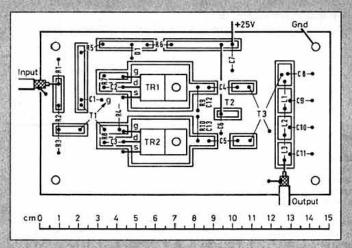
Component and PCB layout for the 25W MOSFET amplifier using double-sided PCB with the other side forming continuous ground-plane (reproduced half actual size).
